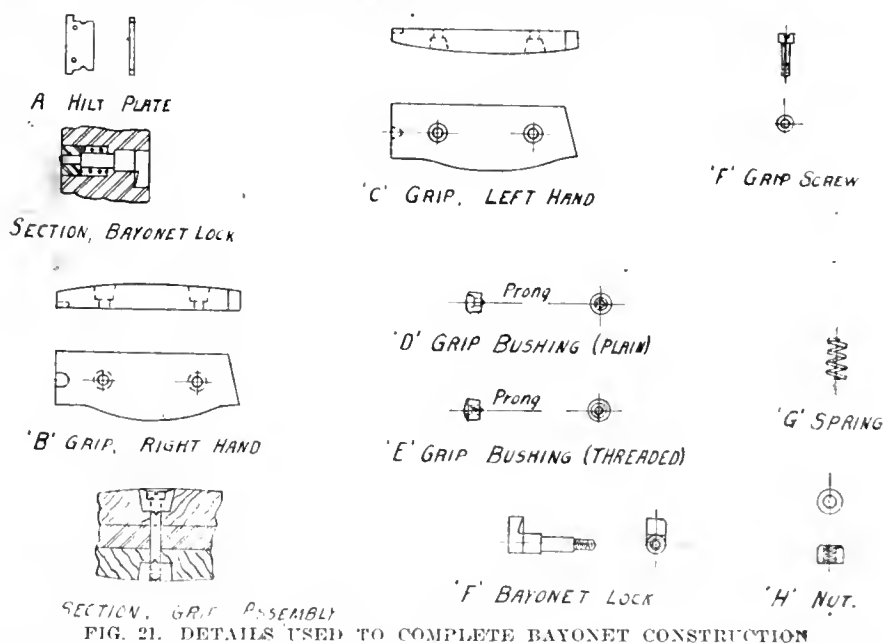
DETAILS USED TO COMPLETE BAYONET CONSTRUCTION
